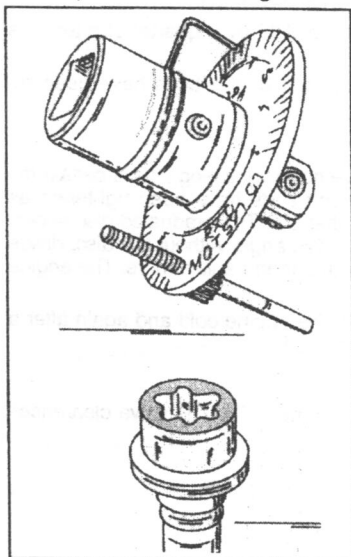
The graduated disc is used to re-tighten the cylinder head bolts to any of the angles required. Cylinder head bolts for engines after April 1989 have a "Torx" recess.
